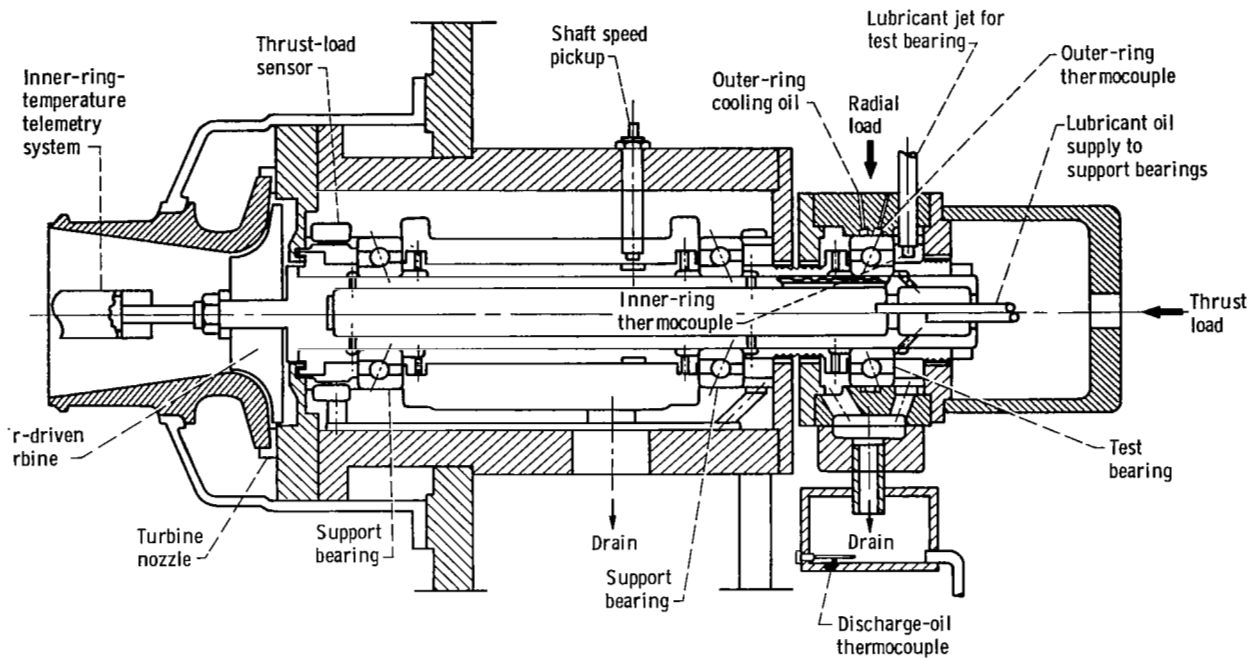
Schematic of high-speed, small-bore-bearing test machine.
